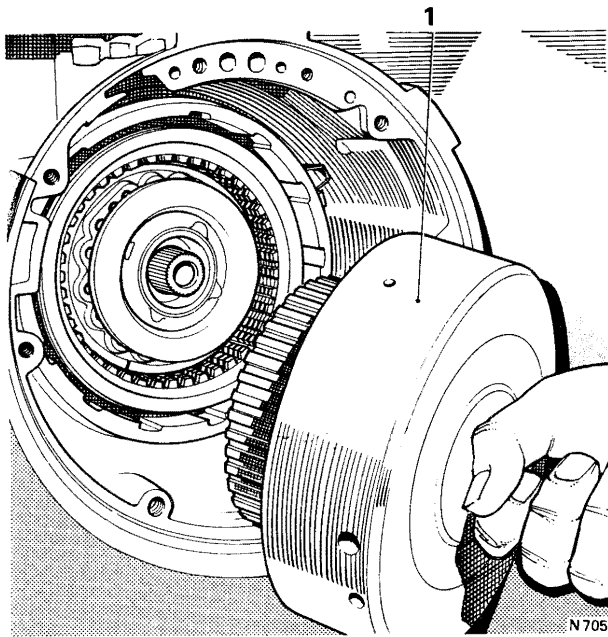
REMOVING THE FORWARD CLUTCH ASSEMBLY
